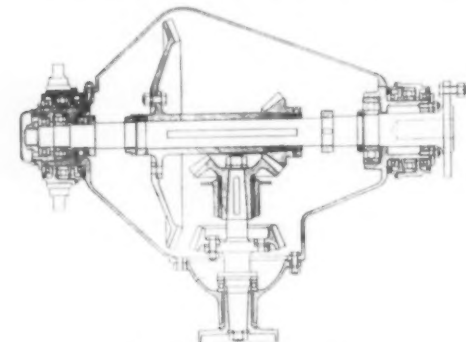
PROPELLER DRIVING GEAR, UPPER PORTION
